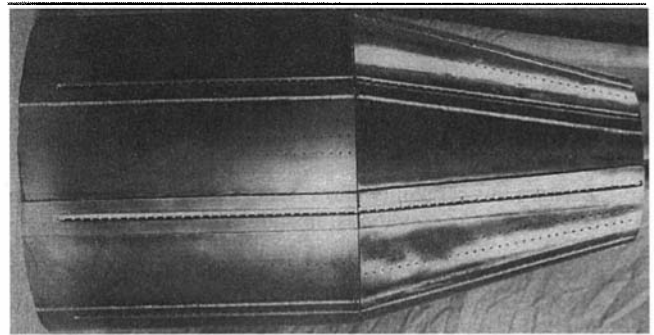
(c) Rich stage combustor liner just prior to laser spot welding of outer skin segments to inner shell
